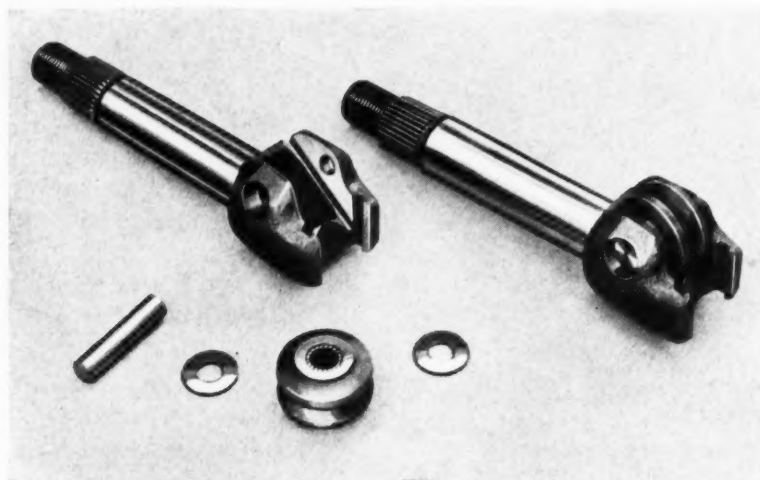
Parts that Make up a Shaft Unit for Gemmer Steering-gear Mechanisms, and an Assembled Shaft Unit
